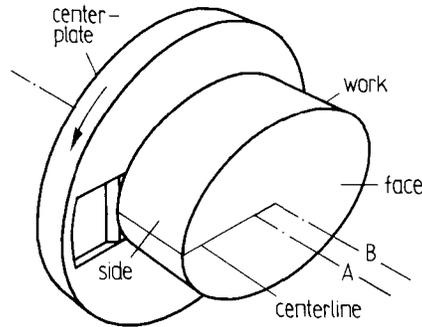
The wood as it is mounted upon the oval lathe mechanism.
